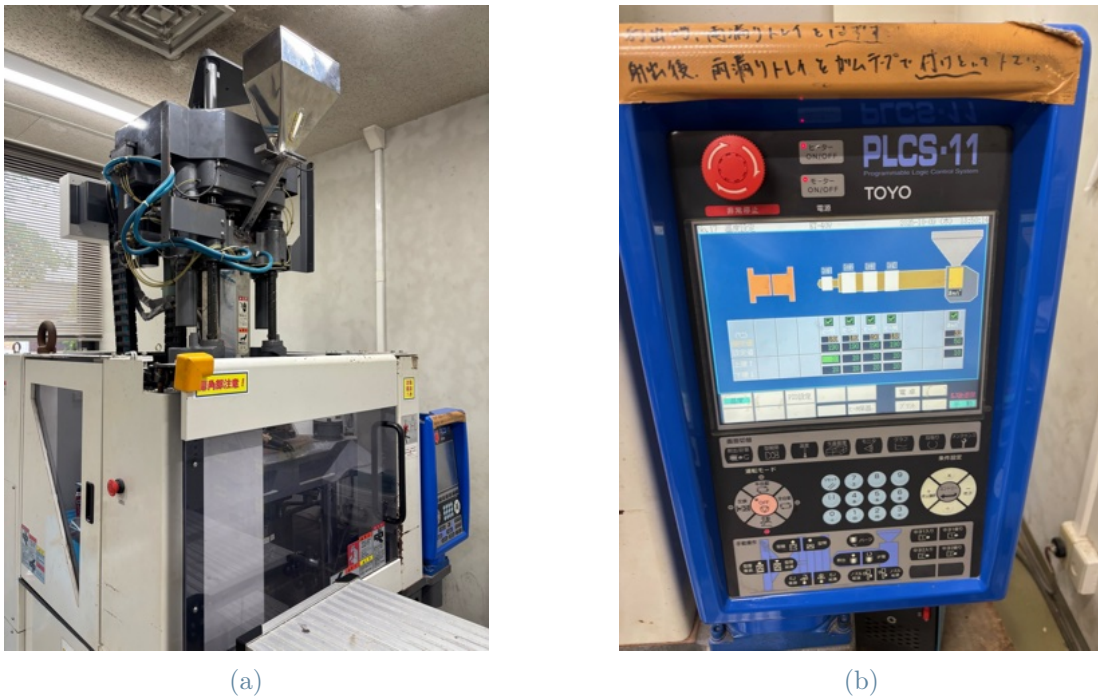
Injection molding machine: (a) injection molding overview; (b) injection molding panel.
